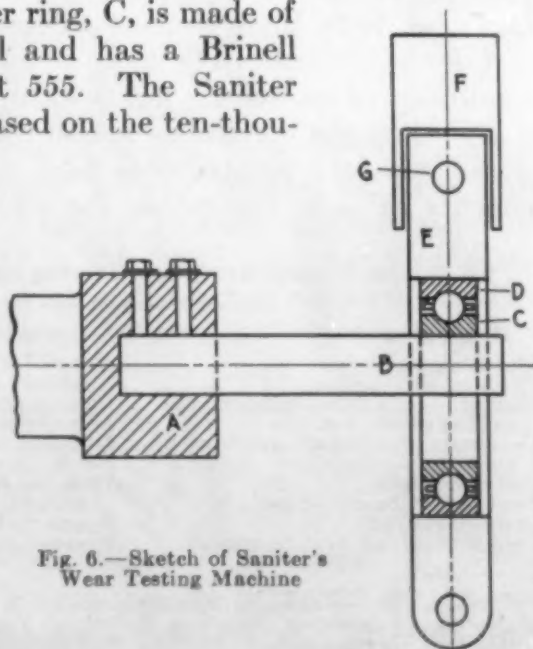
Sketch of Saniter's Wear Testing Machine
